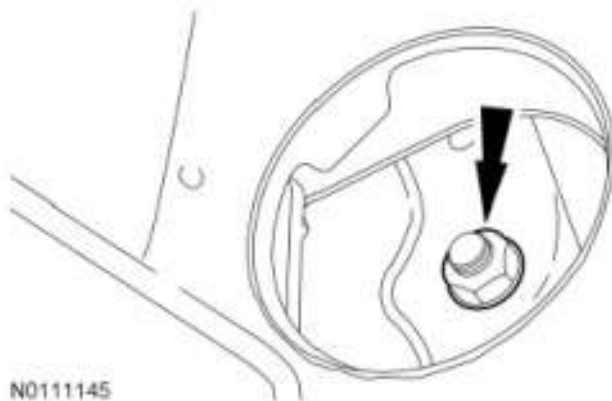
Locating Lower Transmission-To-Engine Bolts
